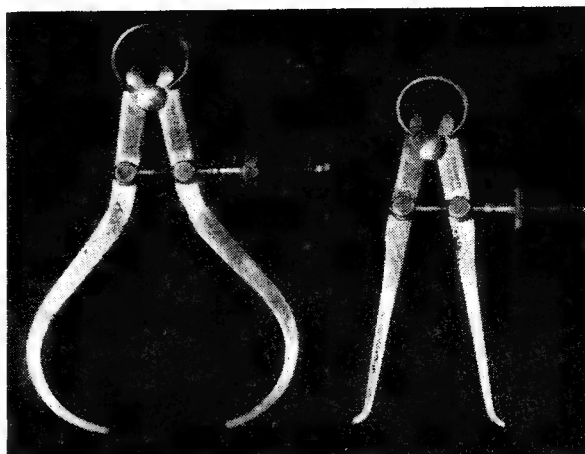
Left—outside calipers. Right—inside calipers. Both have plain spring joints.
